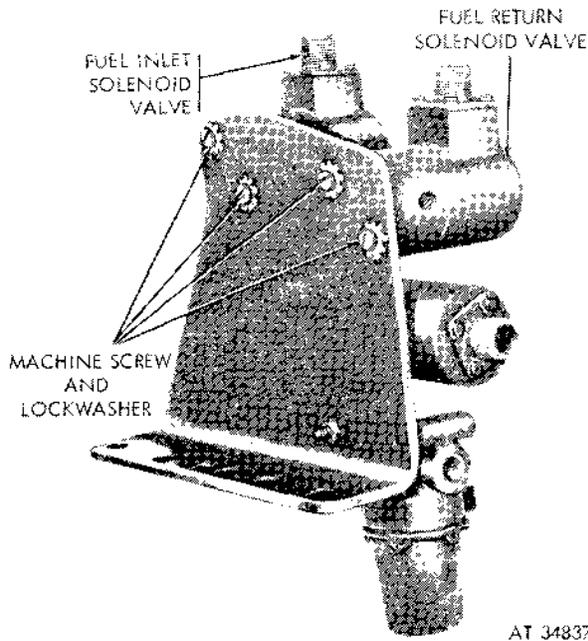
Fuel solenoid valves—multifuel engine LDS 465-1.
